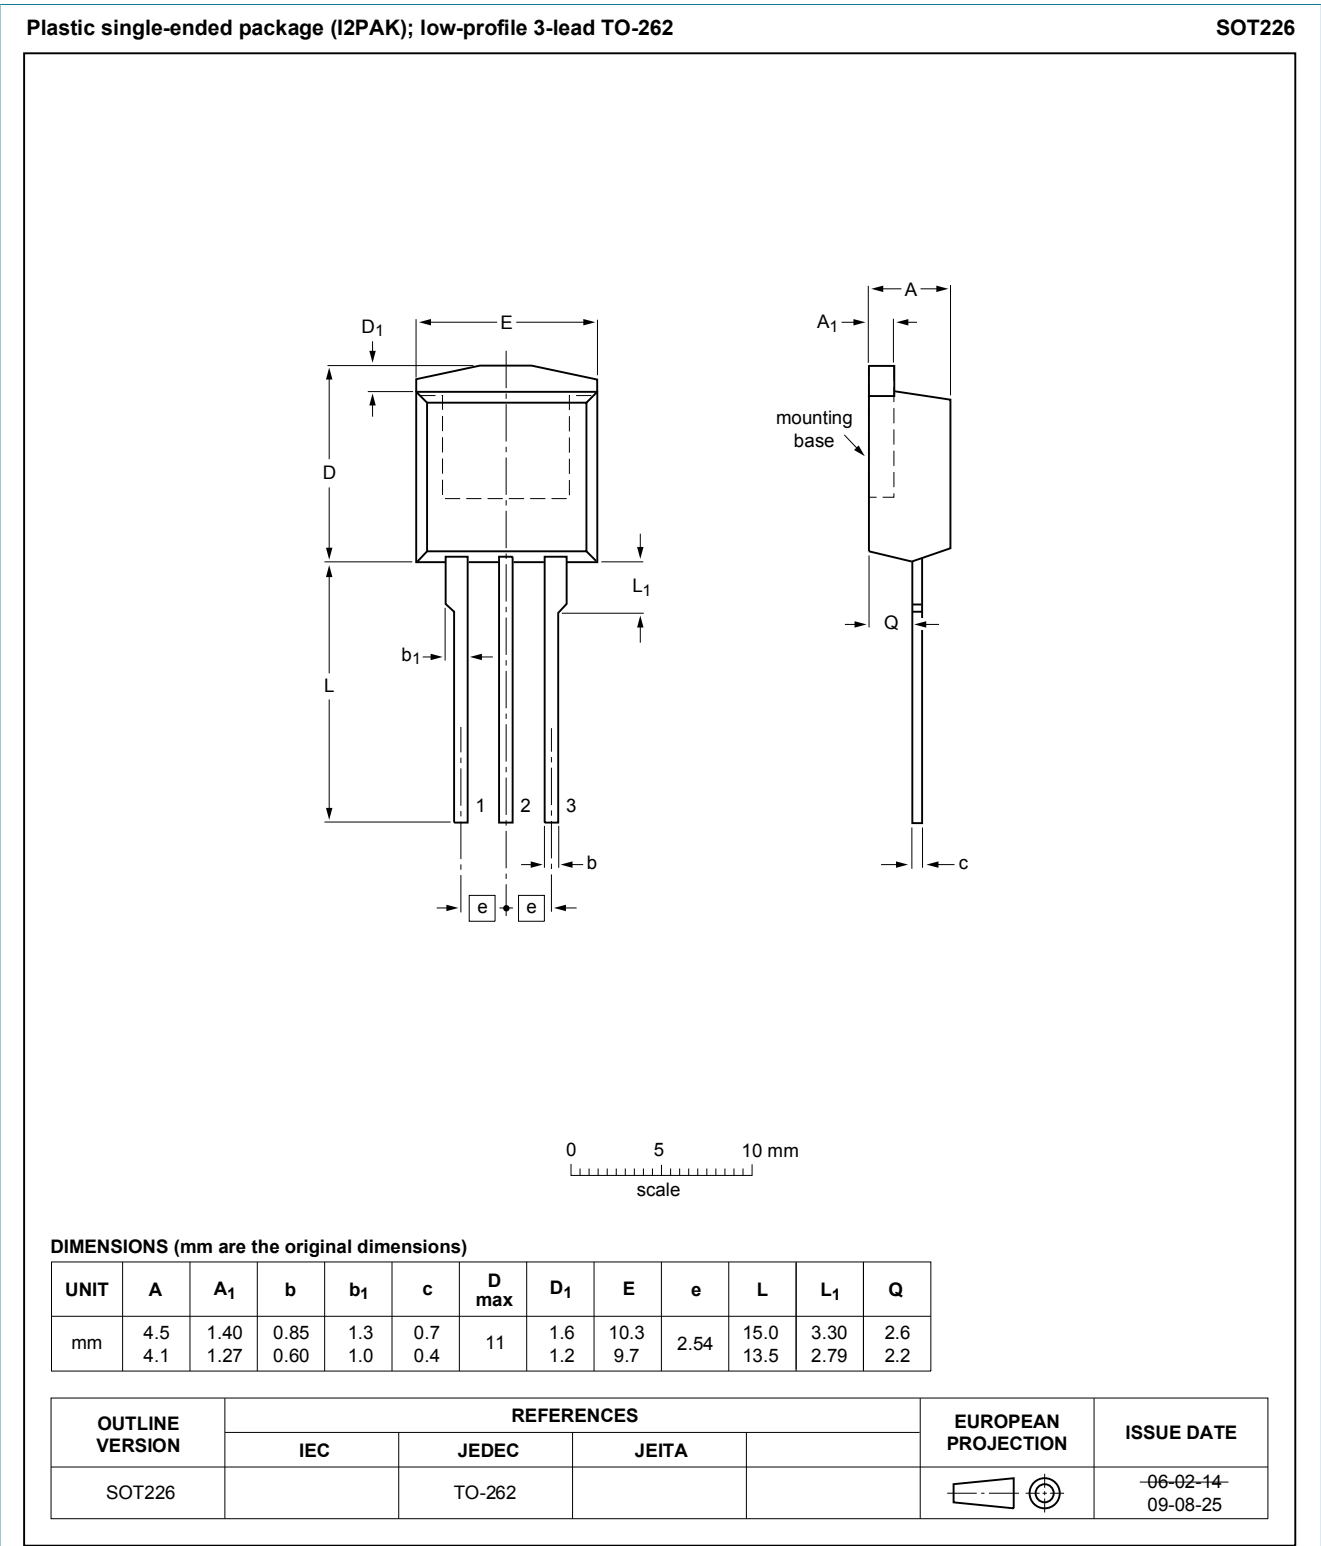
Package outline I<sup>2</sup>PAK (SOT226)
